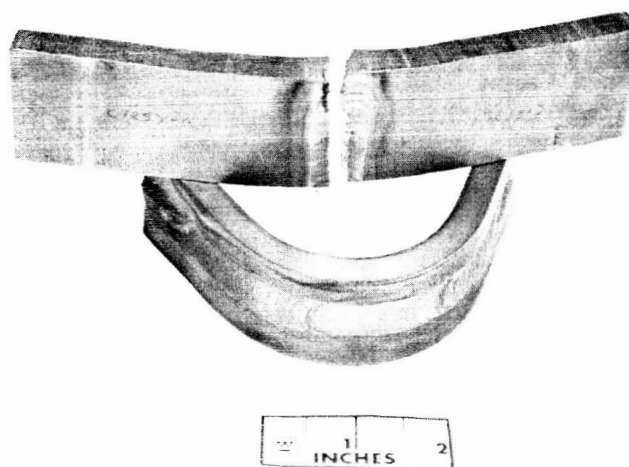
FS-85 and SCb-291 Plate Weld Bend Specimens
